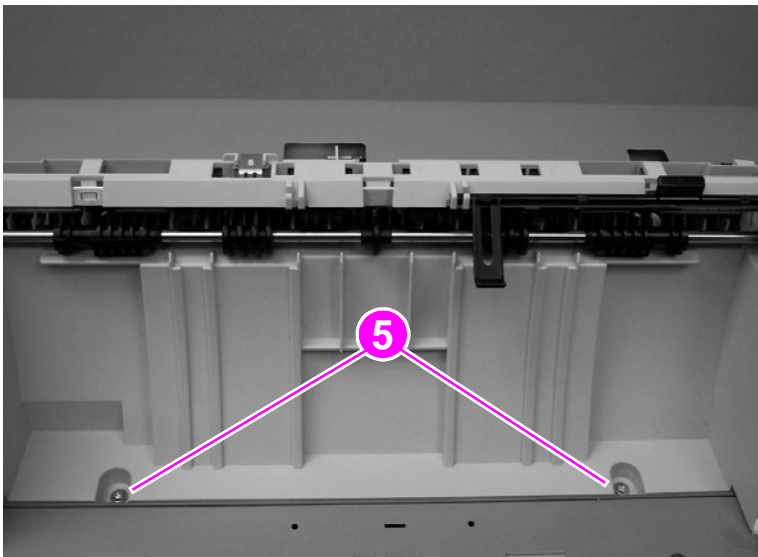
Remove the delivery unit mounting screws (2 of 2)
